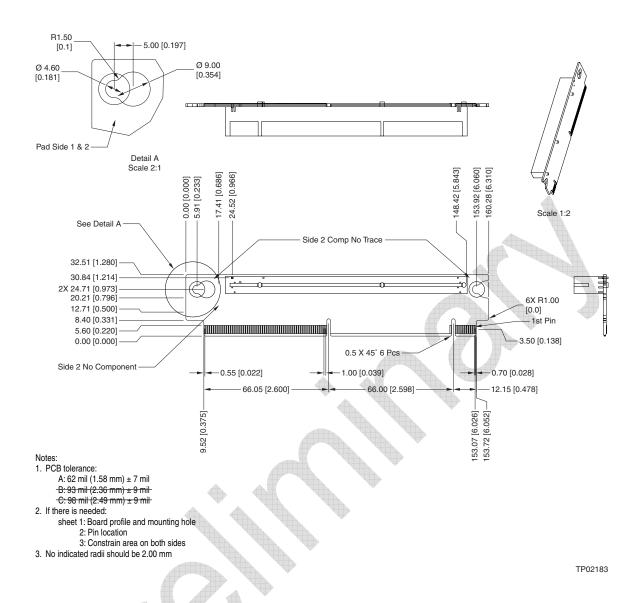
1U Full Height PCI-X* Riser Card Mechanical Drawing
